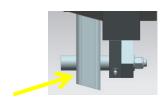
Clamp Ring Pivot Plate Weld Locations
